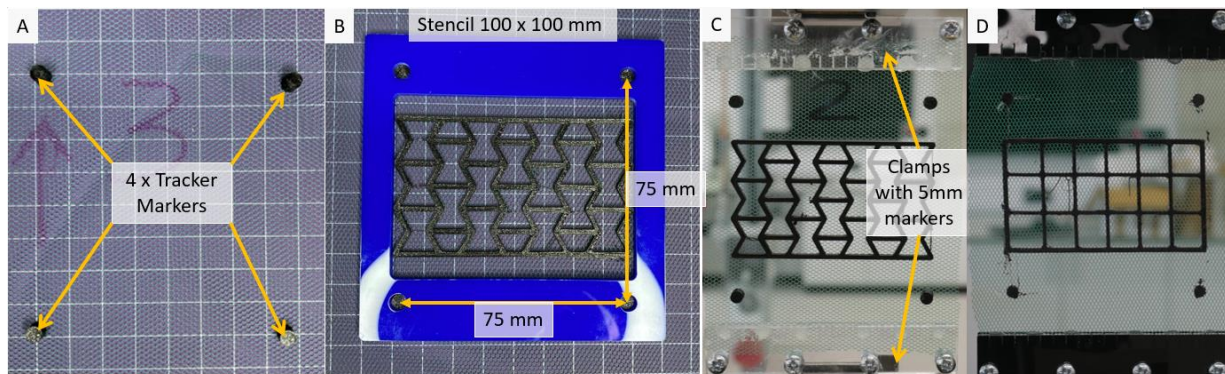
Figure showing (A) the tracking markers printed on a sheet of fabric, (B) shows the stencil used to measure and cut the fabric and (C) sample mounted in the clamp for testing and (D) non-auxetic structure.
